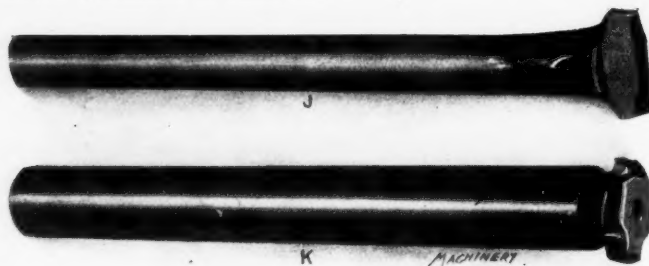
Two Styles of Boring Tools used in the Turret Toolpost
